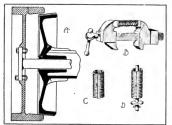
Some Garage Hints: A, Showing How Worn Clutch Bushing Causes Clutch in Drag, Creating Gear Changing Difficulties: B, Method of Compressing Valve Spring in Viac; C, Outlining How Spring is Tied; D, Depicting Its Replace-
